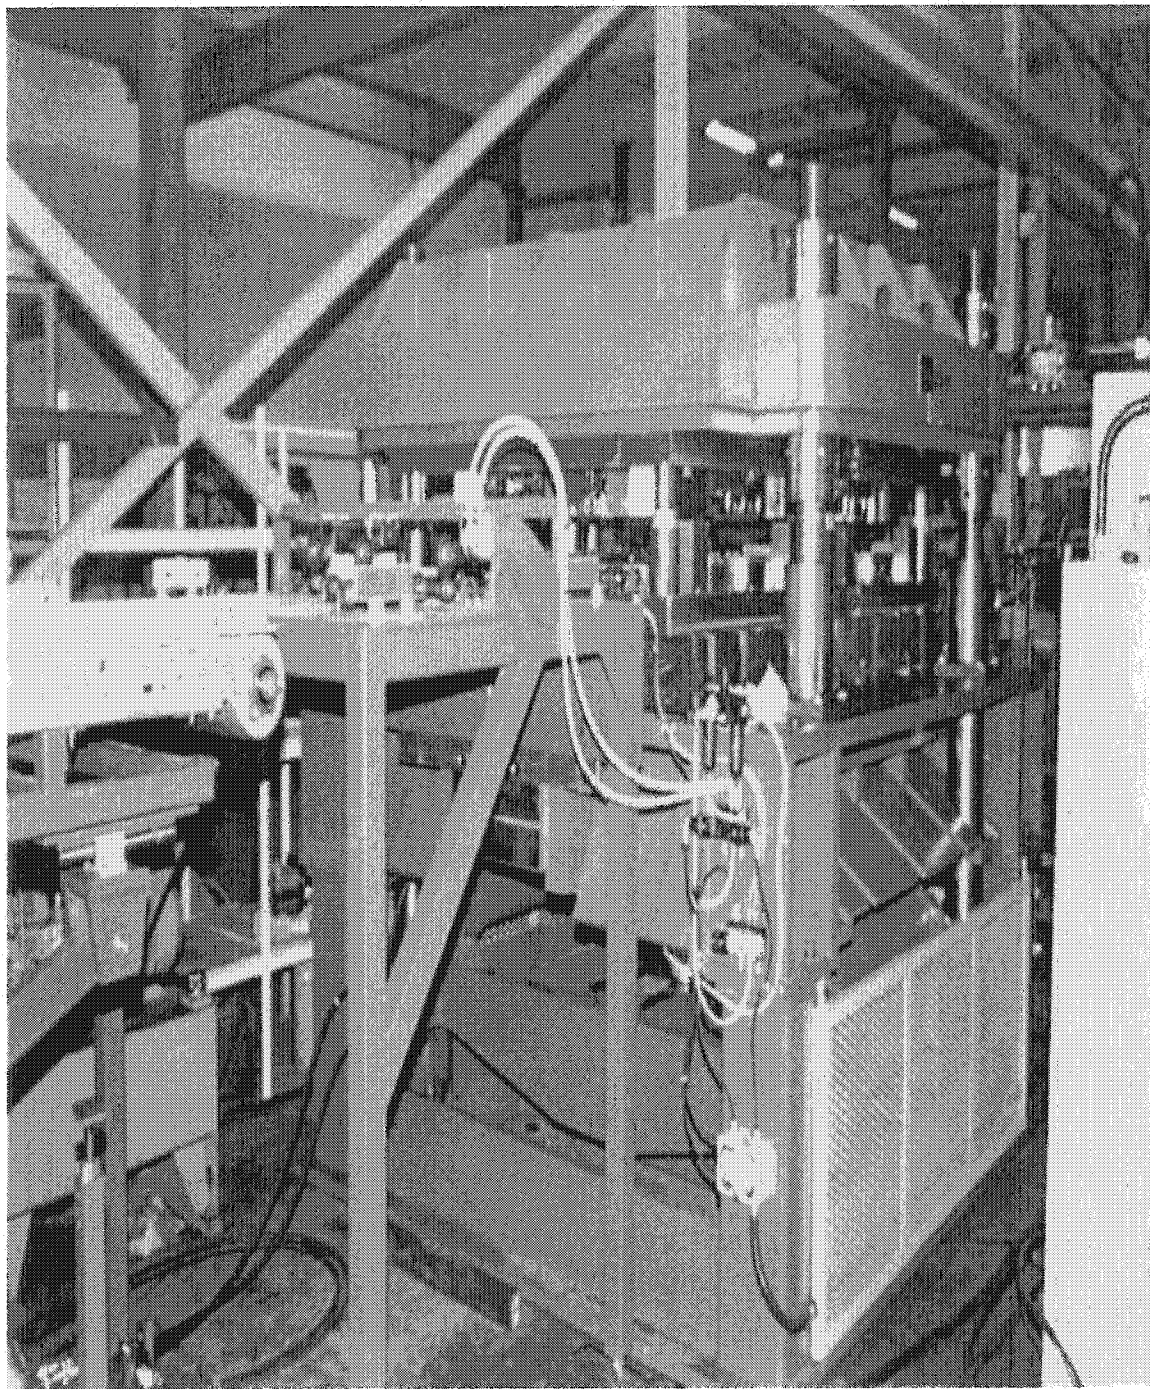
Press and Transfer - Courtesy RLM Manufacturing
